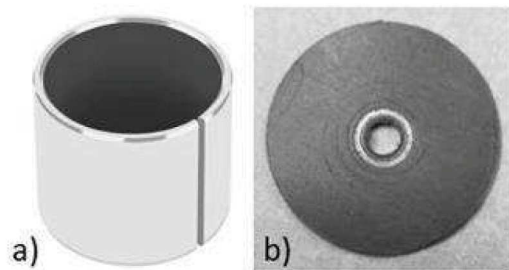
(a) GGB DU® bushing; (b) Test specimen cut from a sheet of the same material.
